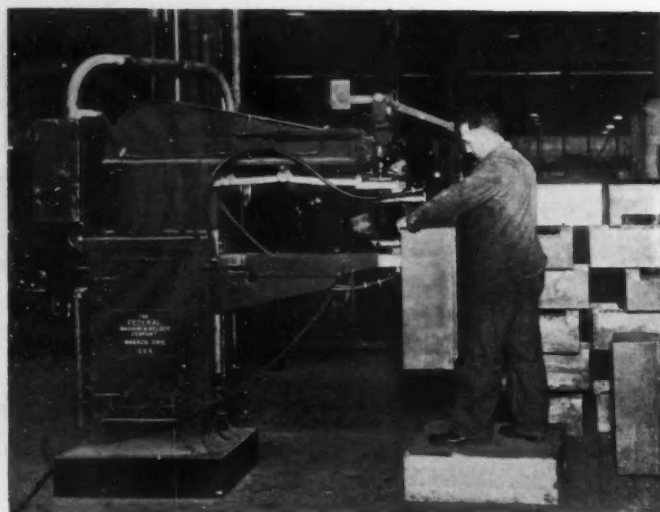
ELECTRIC SPOT-WELDING MACHINE
